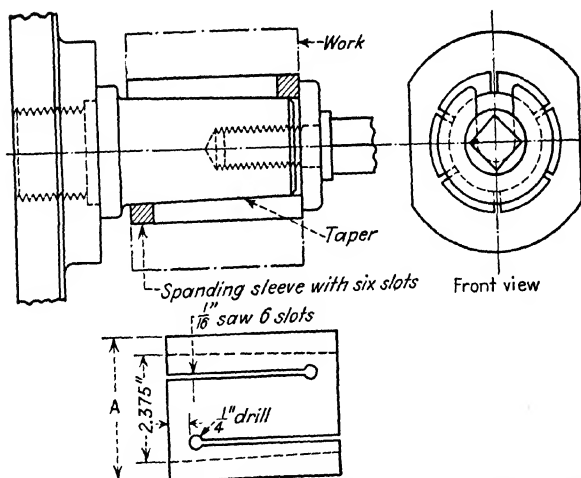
Expanding sleeve is forced on tapered plug by screw at the end.
